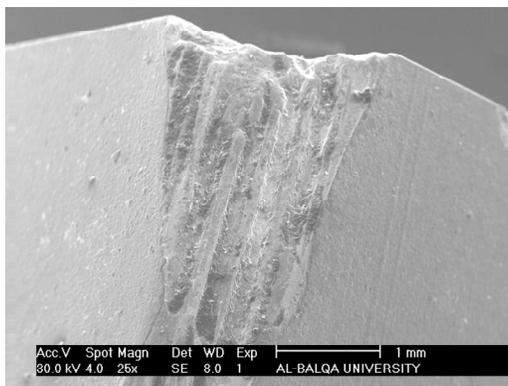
SEM images of coated tool inserts No.4 after machining at 29 m/min
